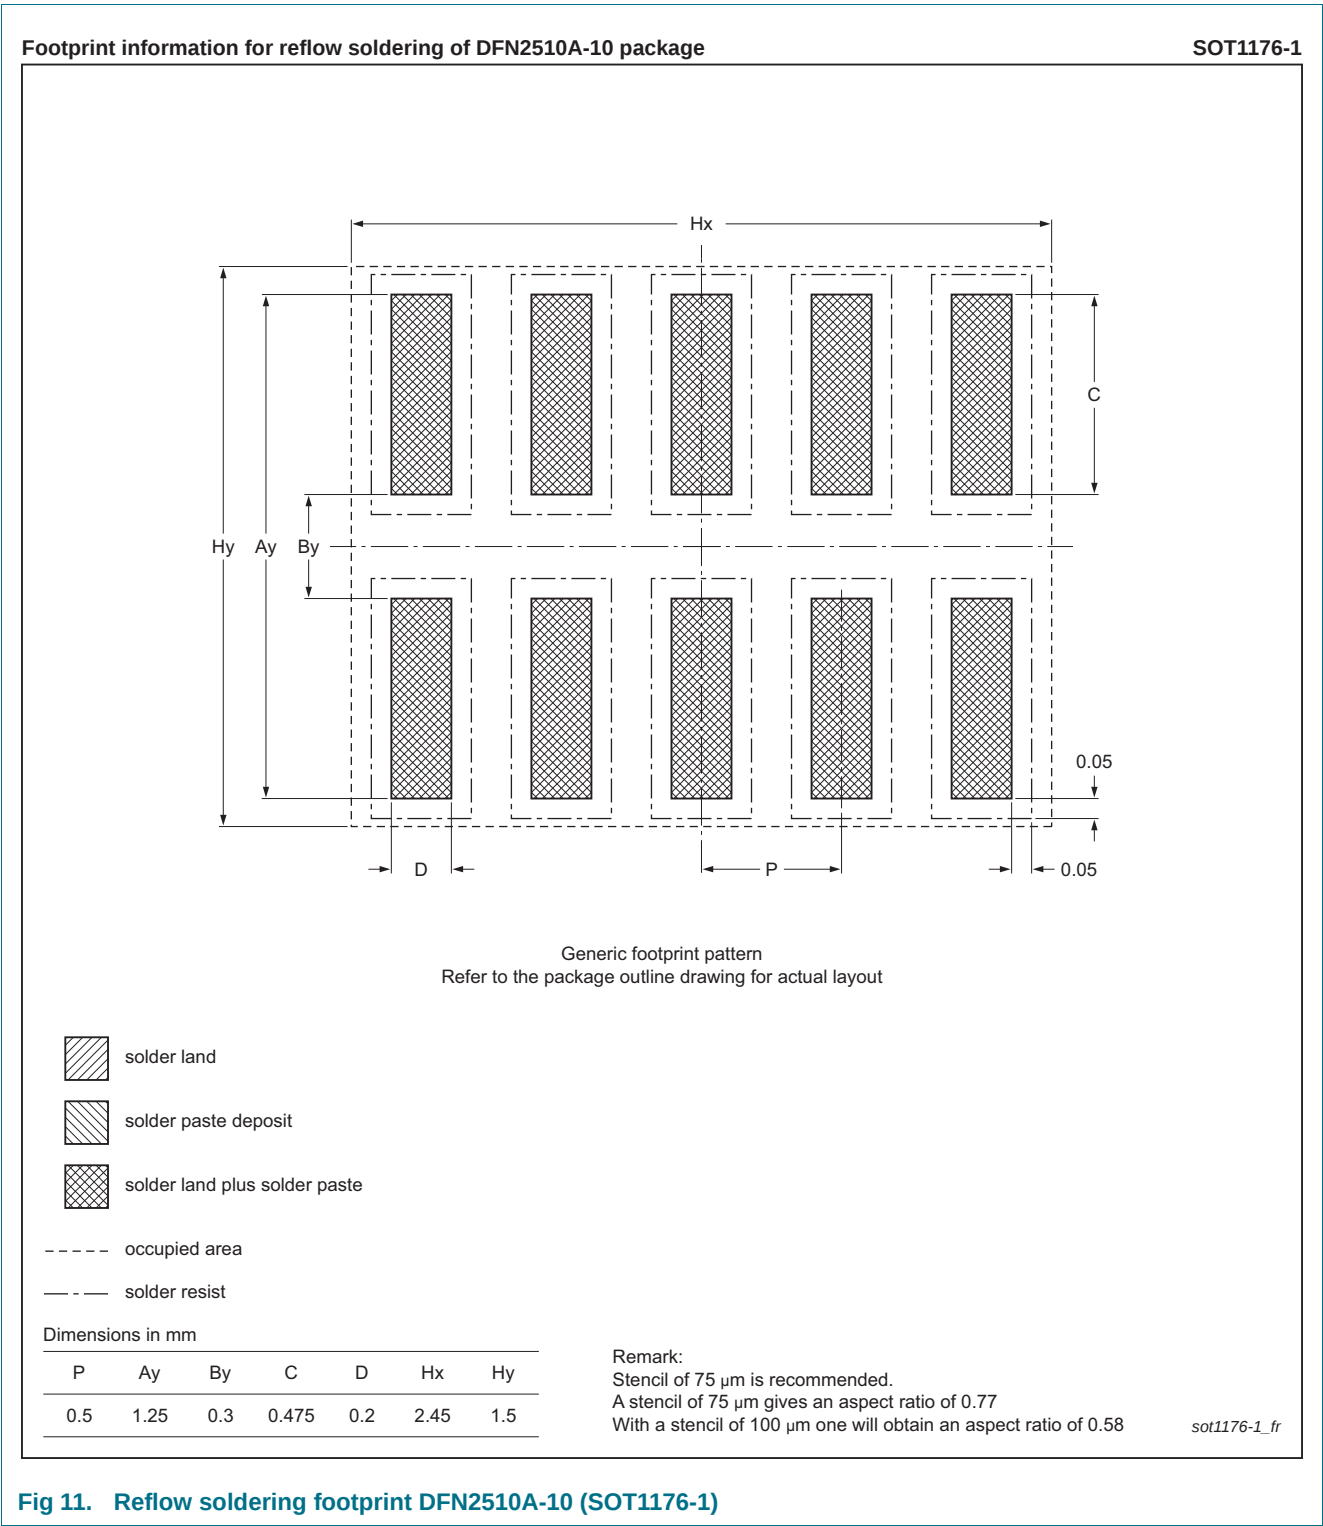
Reflow soldering footprint DFN2510A-10 (SOT1176-1)
